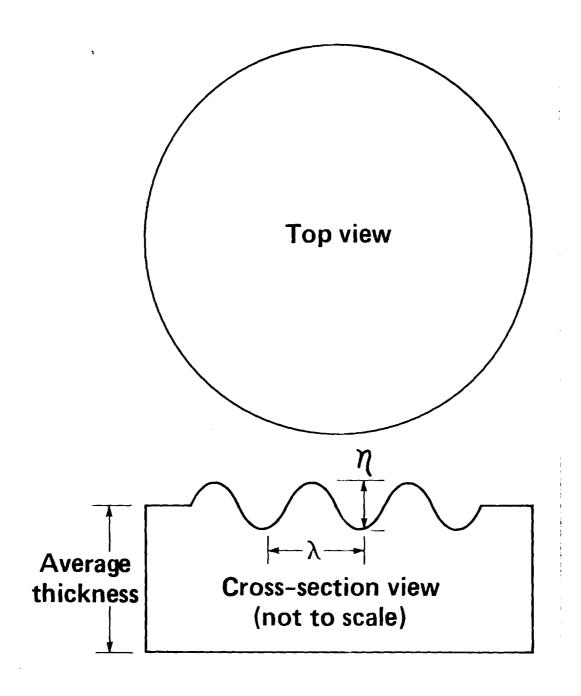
Definition of λ and η for machined-in R-T target defects
